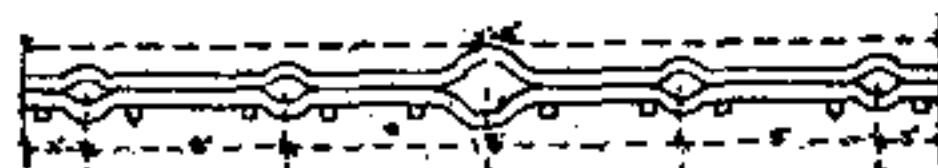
CROSS-ARM FOR FIXTURE A.
